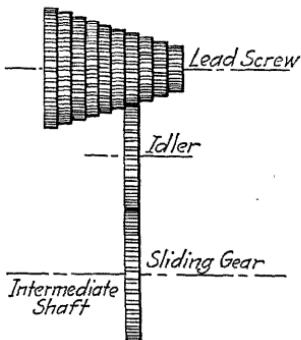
Layout of a nest of ten gears, showing arrangement of connecting the lead screw with the change gear trains of a modern screw cutting lathe.
